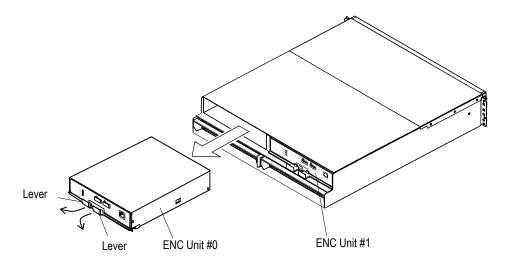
Removing ENC Unit (RKAKS)
